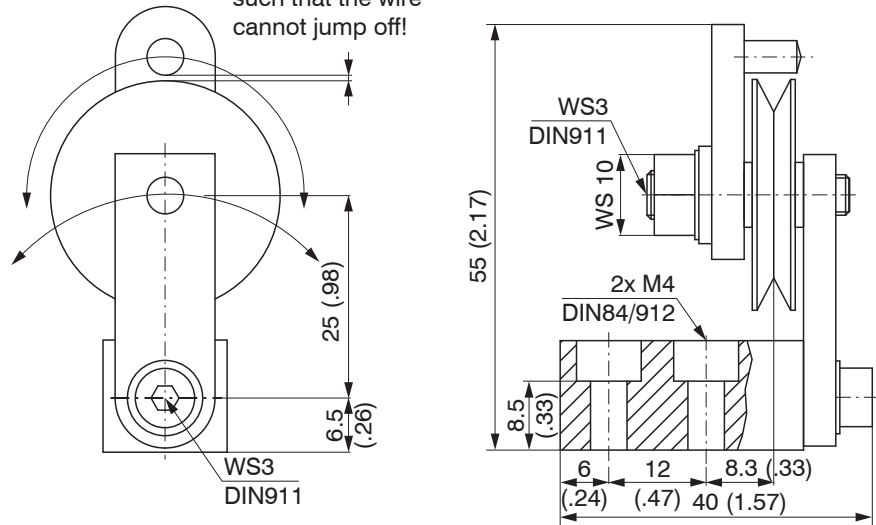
Guide pulley TR1-WDS with mounting socket, dimensions in mm (inches), not to scale
